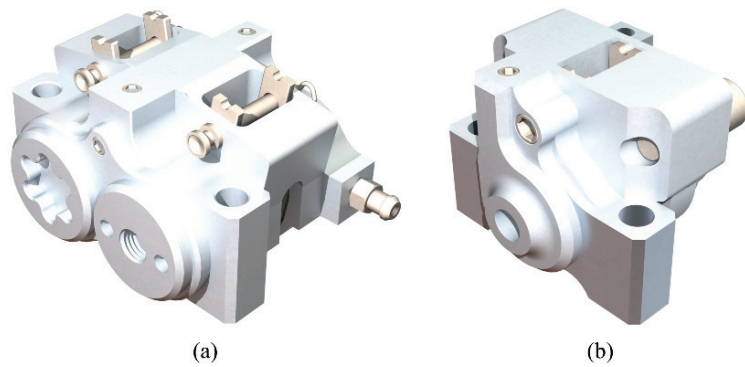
The ISR calipers in SolidWorks: (a) Front caliper and (b) Rear caliper.
